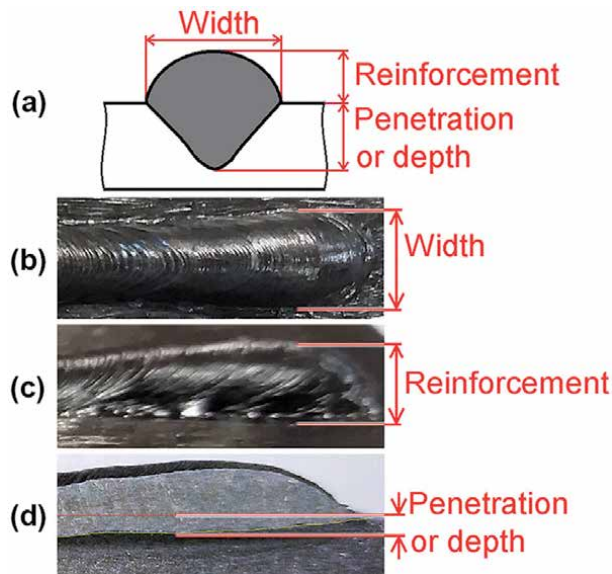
Geometric dimensions of the weld bead: (a) cross-section, (b) top view, (c) side view, and (d) side view of a longitudinal cut [7].
